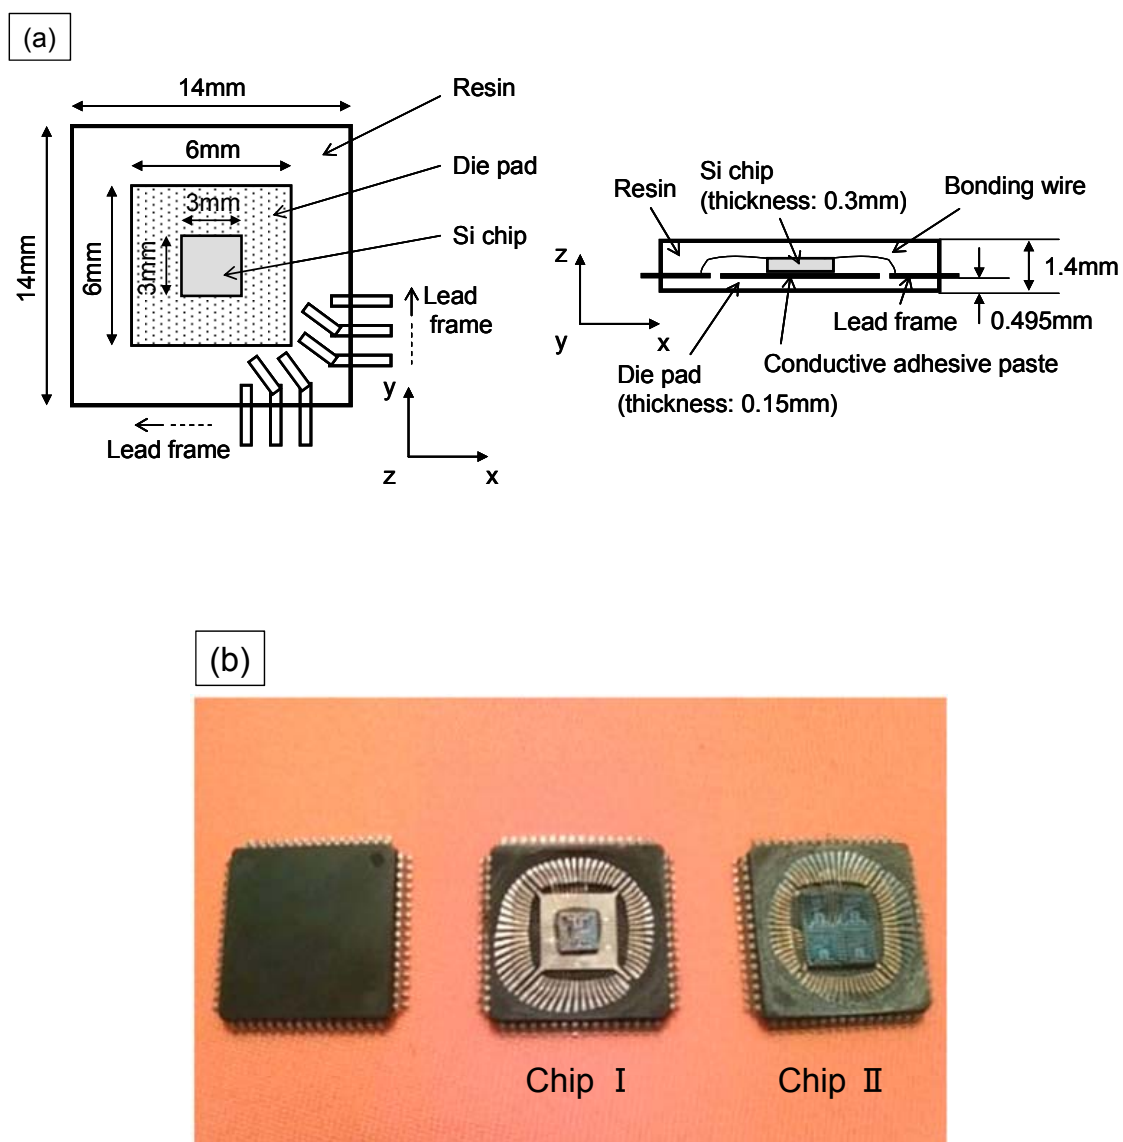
Quad Flat Package (QFP) specimens. (a) Schematic diagram of specimens, (b) Picture of specimens.
